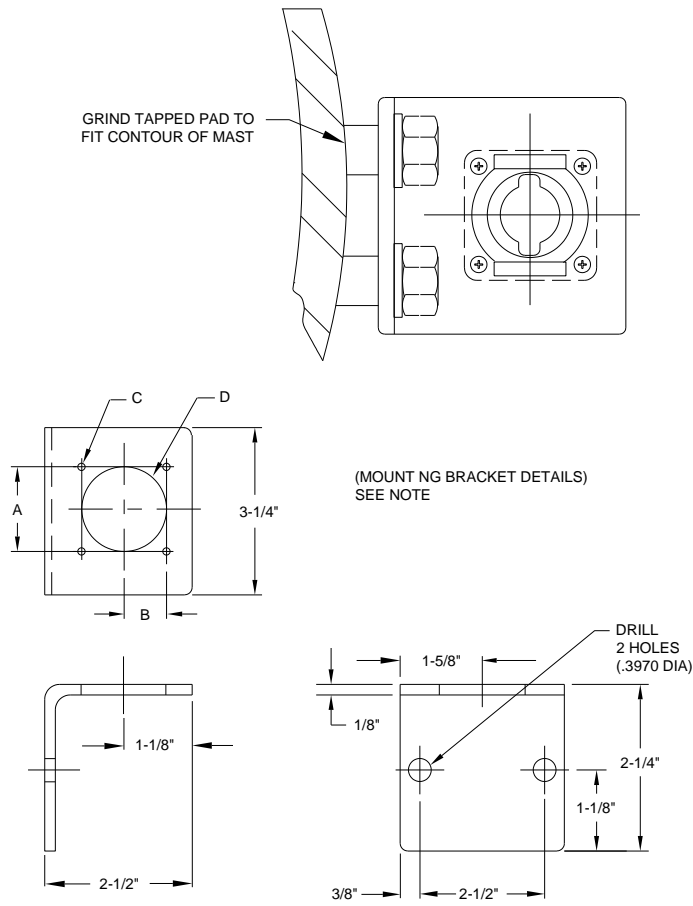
B97. Cableways on masts with connectors (surface ships).
